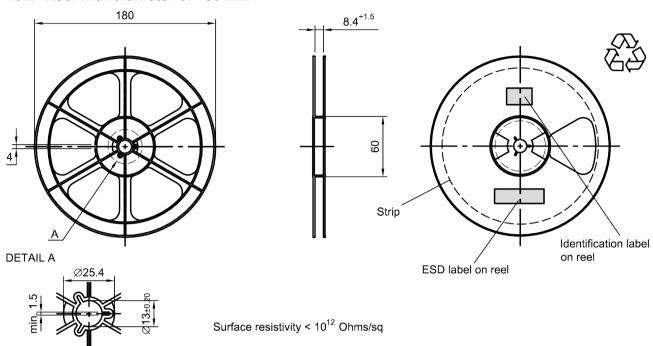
Drawing of reel (first-angle projection) with diameter of 180 mm.
